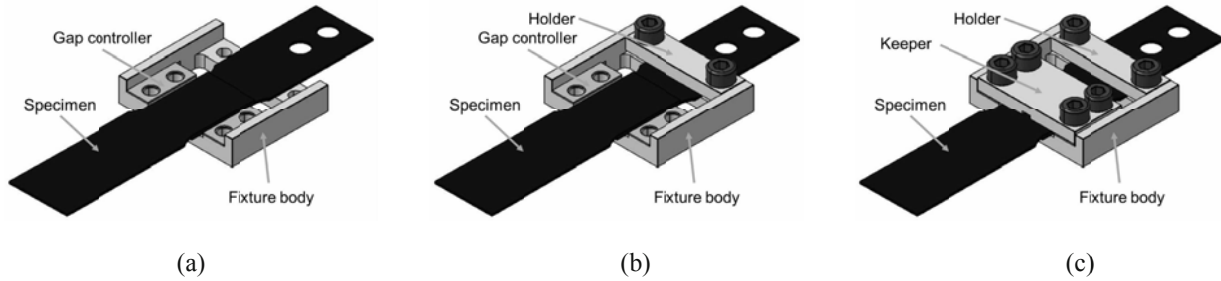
Schematic design of the fixture set for the failure test of a spot weld under pure-shear loading condition: (a) assemble the fixture body and specimen; (b) clamp the specimen with the holder; (c) assemble the keeper to prevent the rotation of a spot weld.
